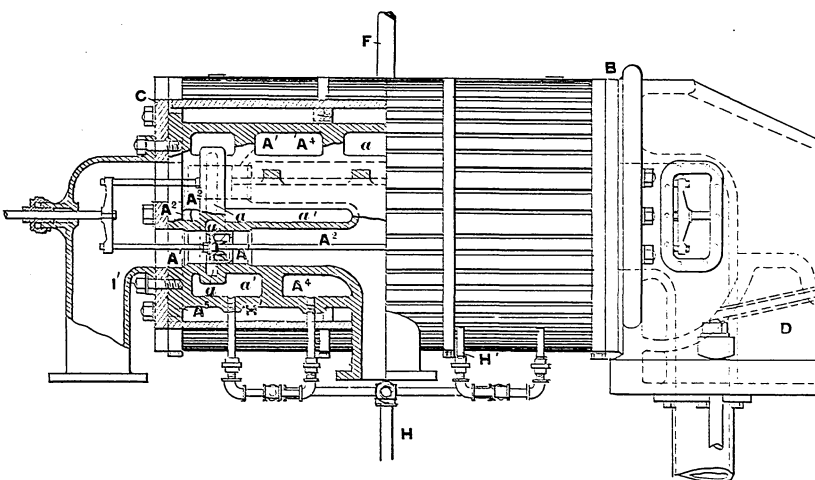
Side Sectional Elevation Low Pressure Cylinder.
